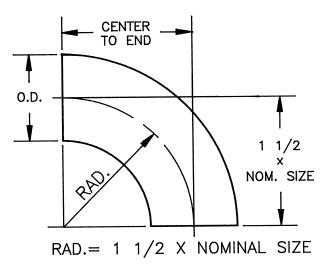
Center-to-end dimension of a long-radius elbow.
